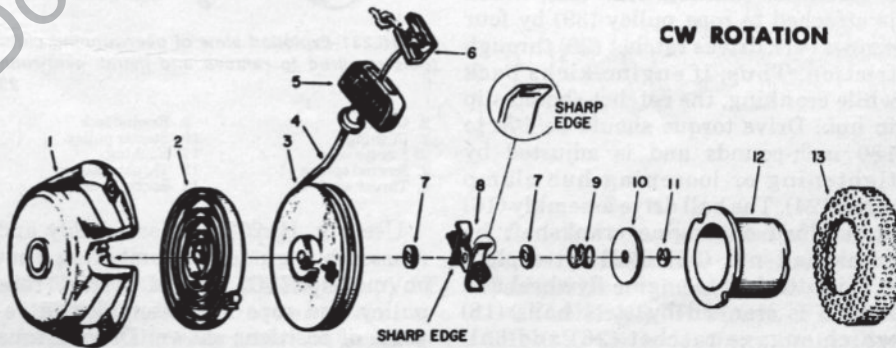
Exploded view of Fairbanks-Morse starter used on WIZ series and model Super 77. Fig. HL229 shows proper method of assembling friction shoe assembly if it has been disassembled for some reason; individual parts of friction shoe assembly are not available. Note direction for sharp edges of shoes when reassembling starter.
